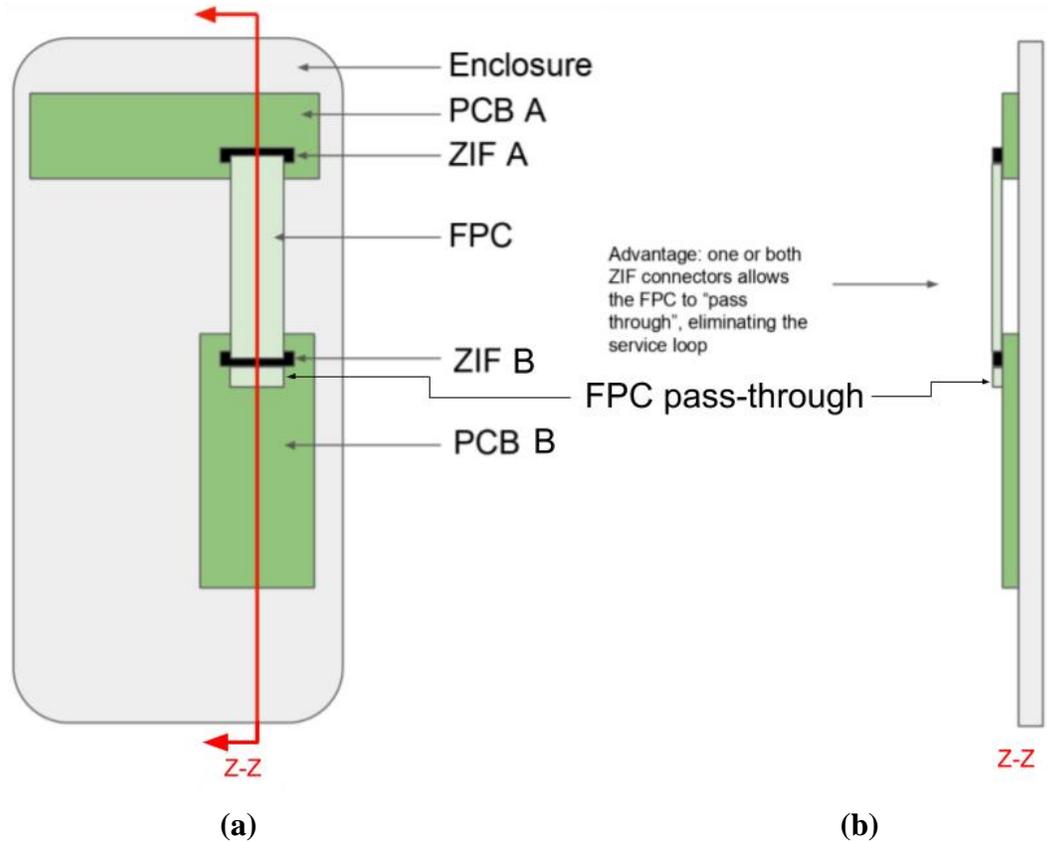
An FPC connecting two PCBs: (a) Top view; (b) Cross-section at ZZ. Due to part and assembly tolerances, a service loop forms in the FPC
